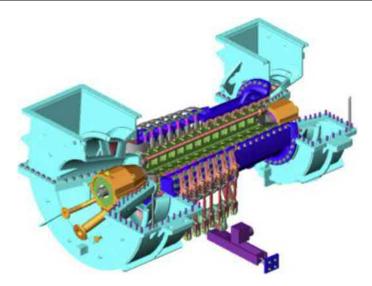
Axial compressor casing with large rectangular inlet and outlet connections.
